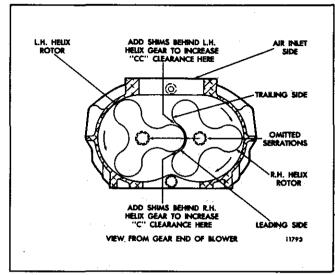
Diagram Showing Proper Location of Shims for Correct Rotor Lobe Clearances
